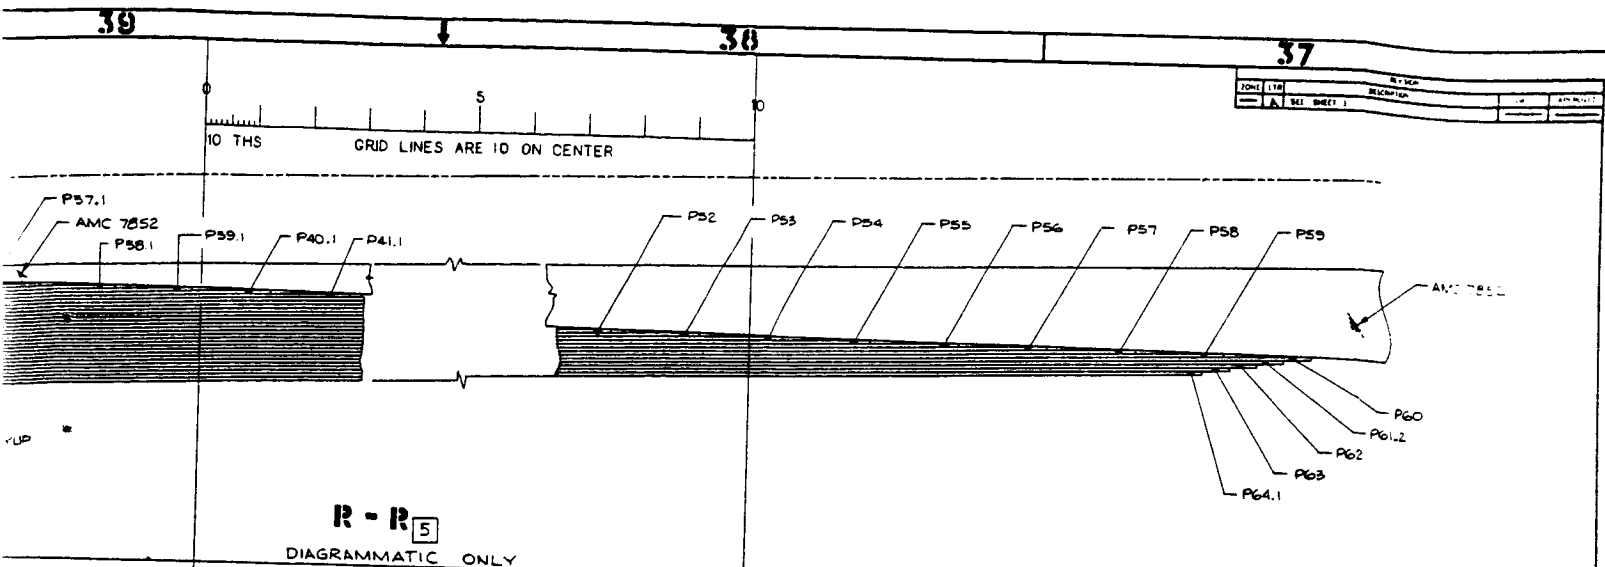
DRAWING AMC7847 - FORWARD CENTER SPAR ASSEMBLY
